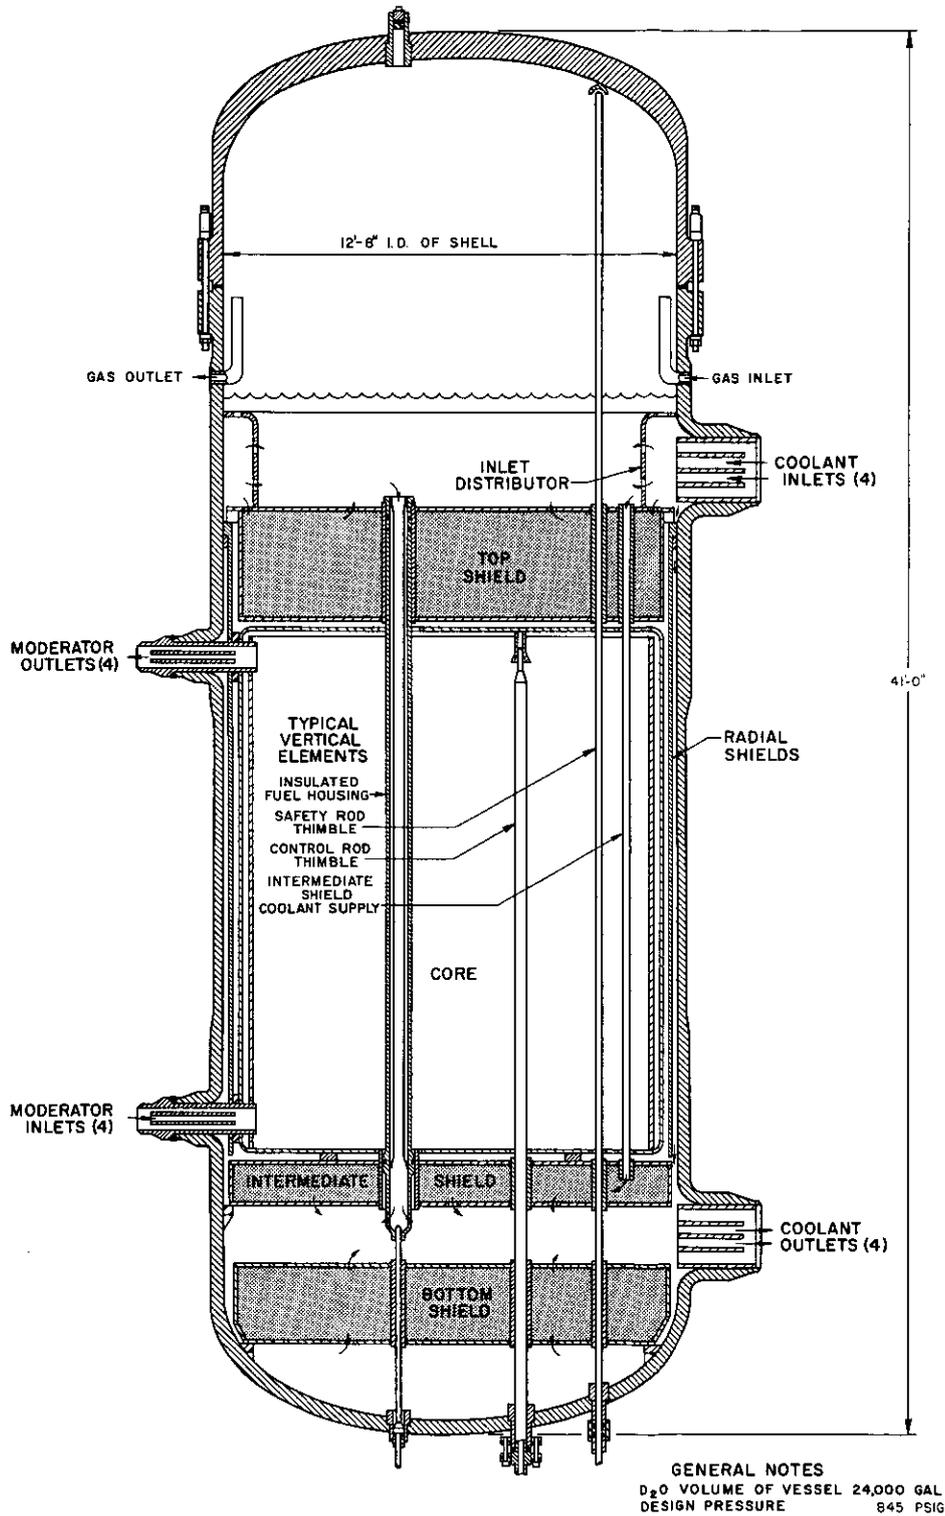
PRESSURE VESSEL REACTOR - LIQUID D₂O COOLED - COLD MODERATOR
